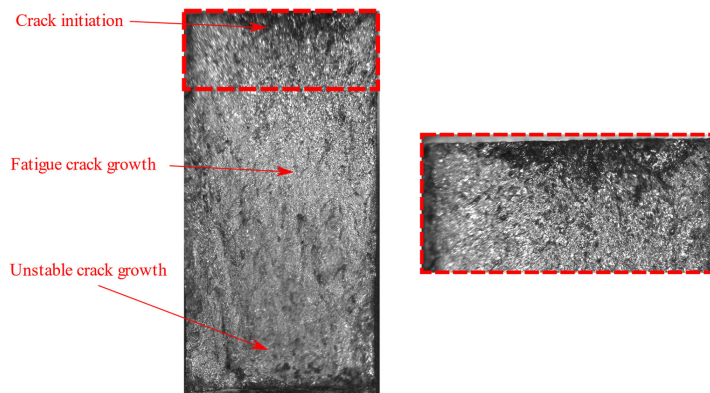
Fracture surface of a broken dog-bone specimen of test condition NCARB_S050_LP.
